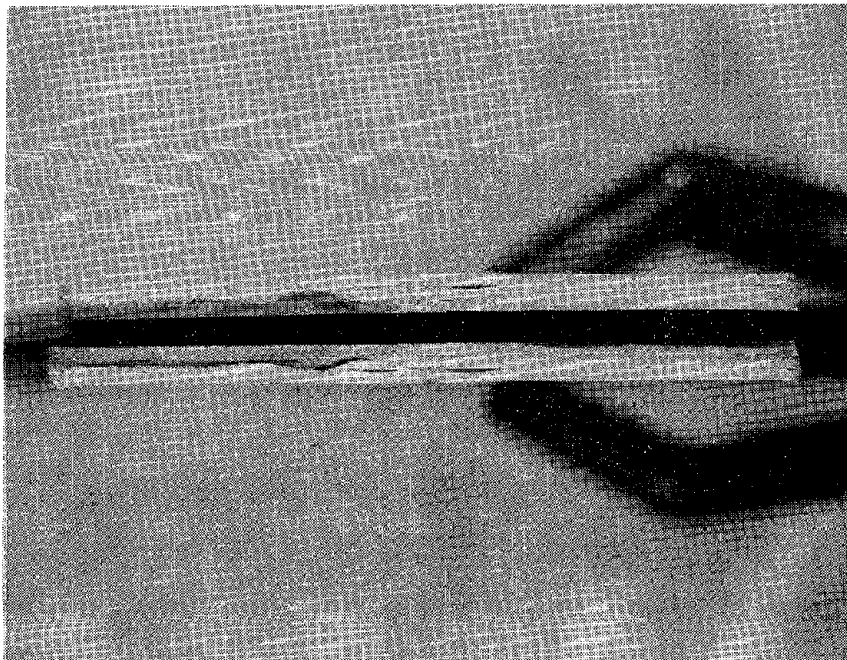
Fracture Surface of Specimen No. 353492-10A - Elox Notch at Center of Upper Edge
